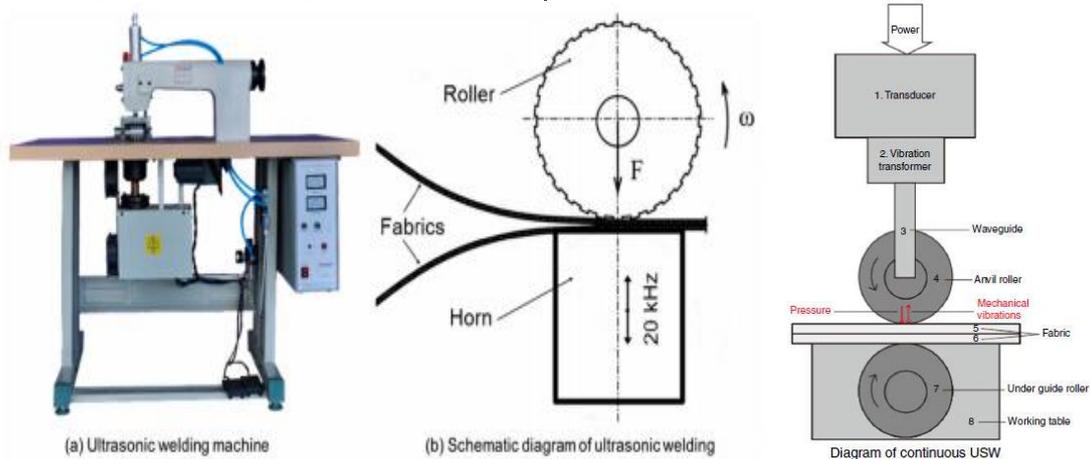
Scheme of the USW sewing machine mechanism, and conversion sequence
